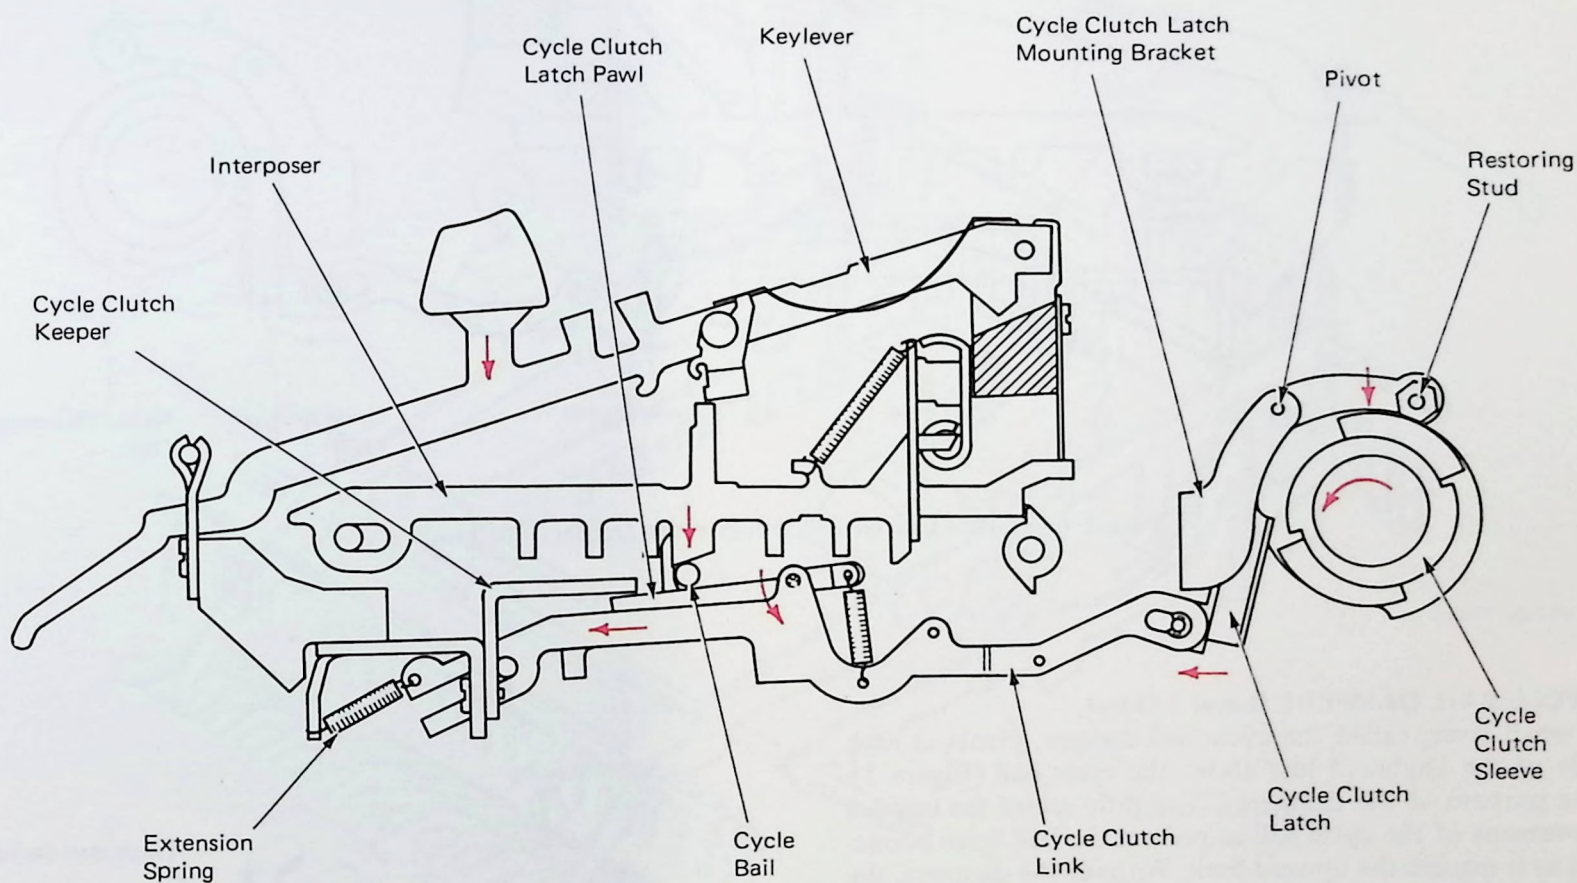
Cycle Clutch Latch Mechanism (Right Side View)
